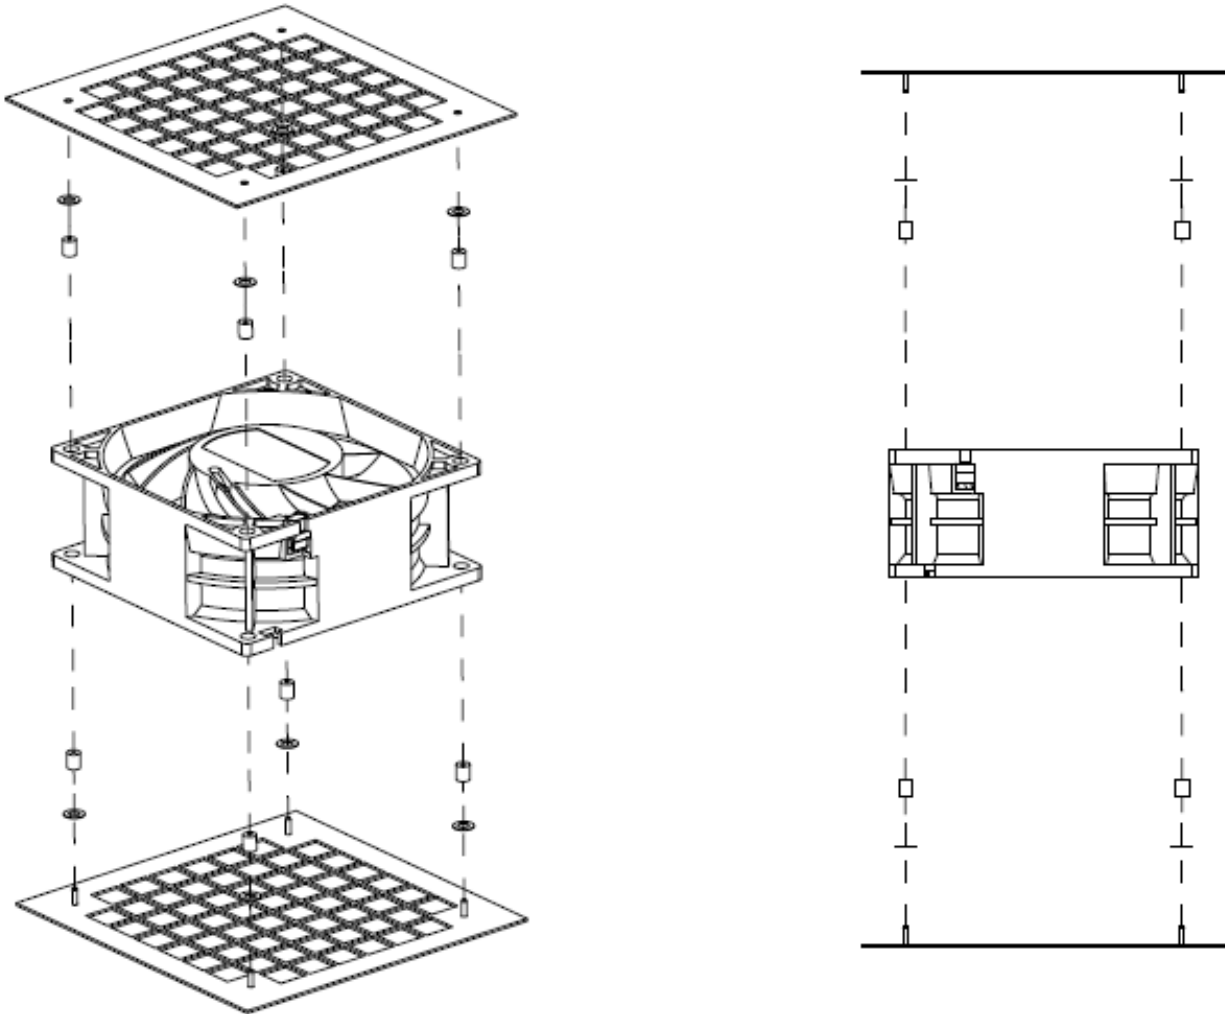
Retrofit Vibration Isolator Design Exploded View
